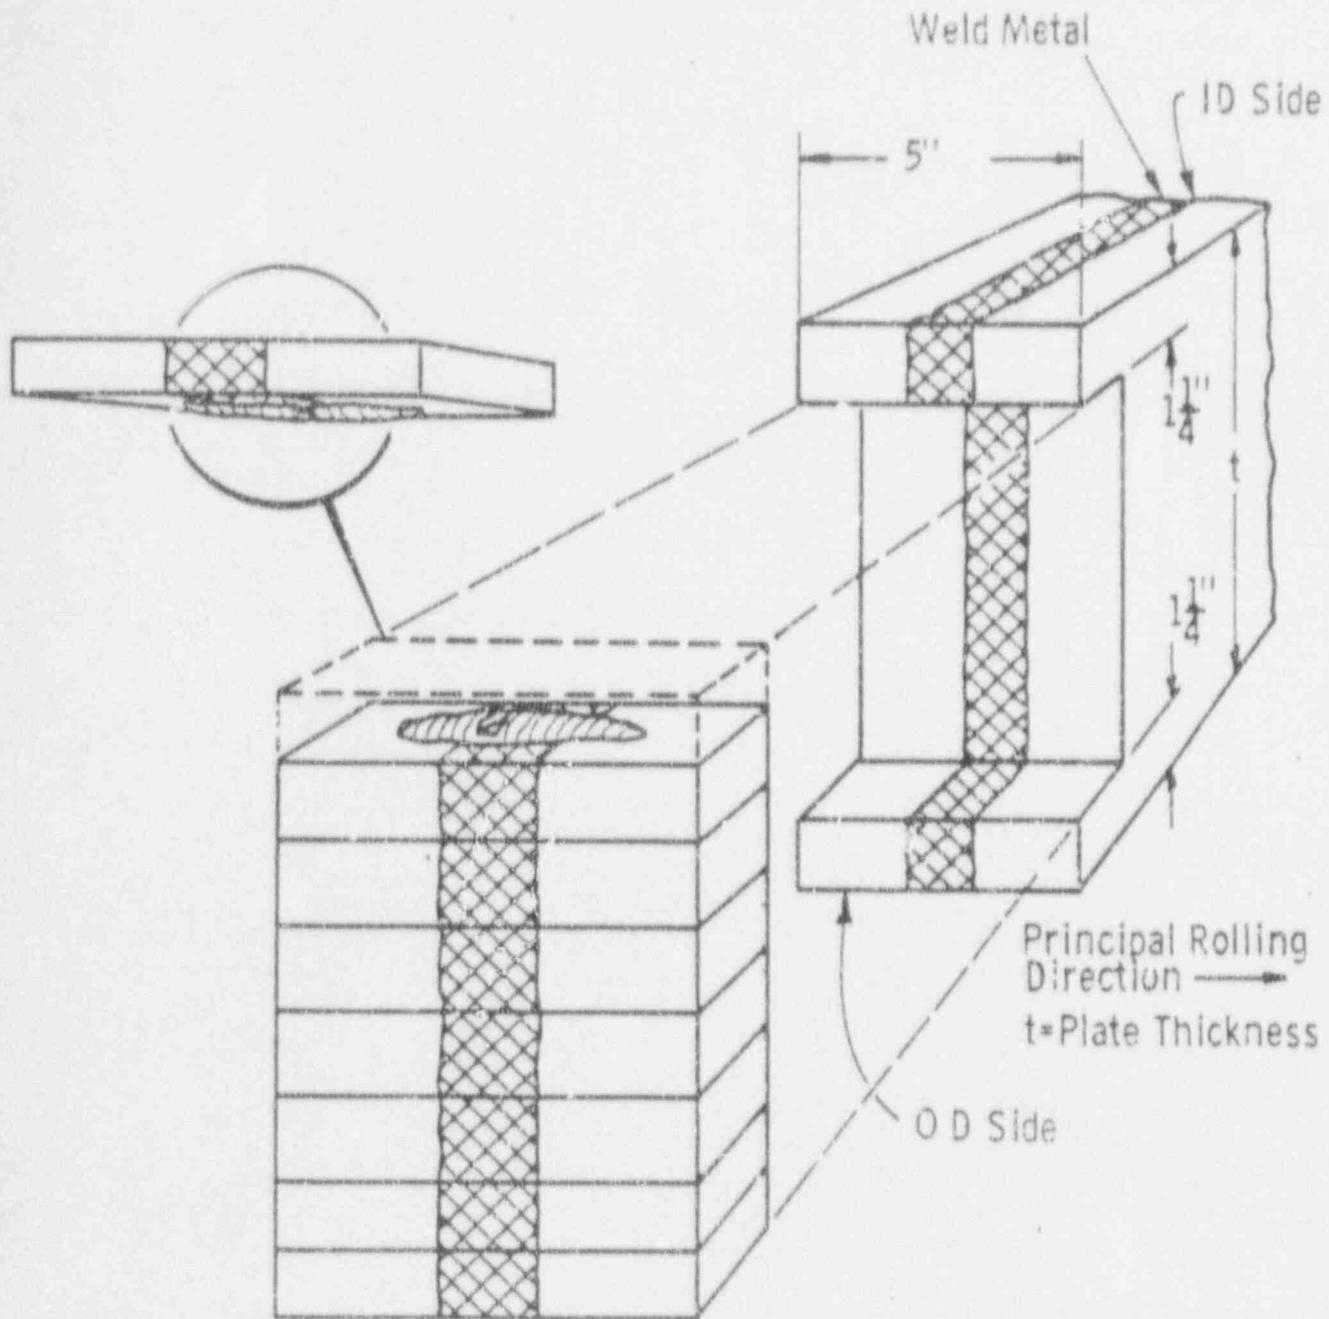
Location of Drop Weight Specimens Within Weld Metal Test Material
